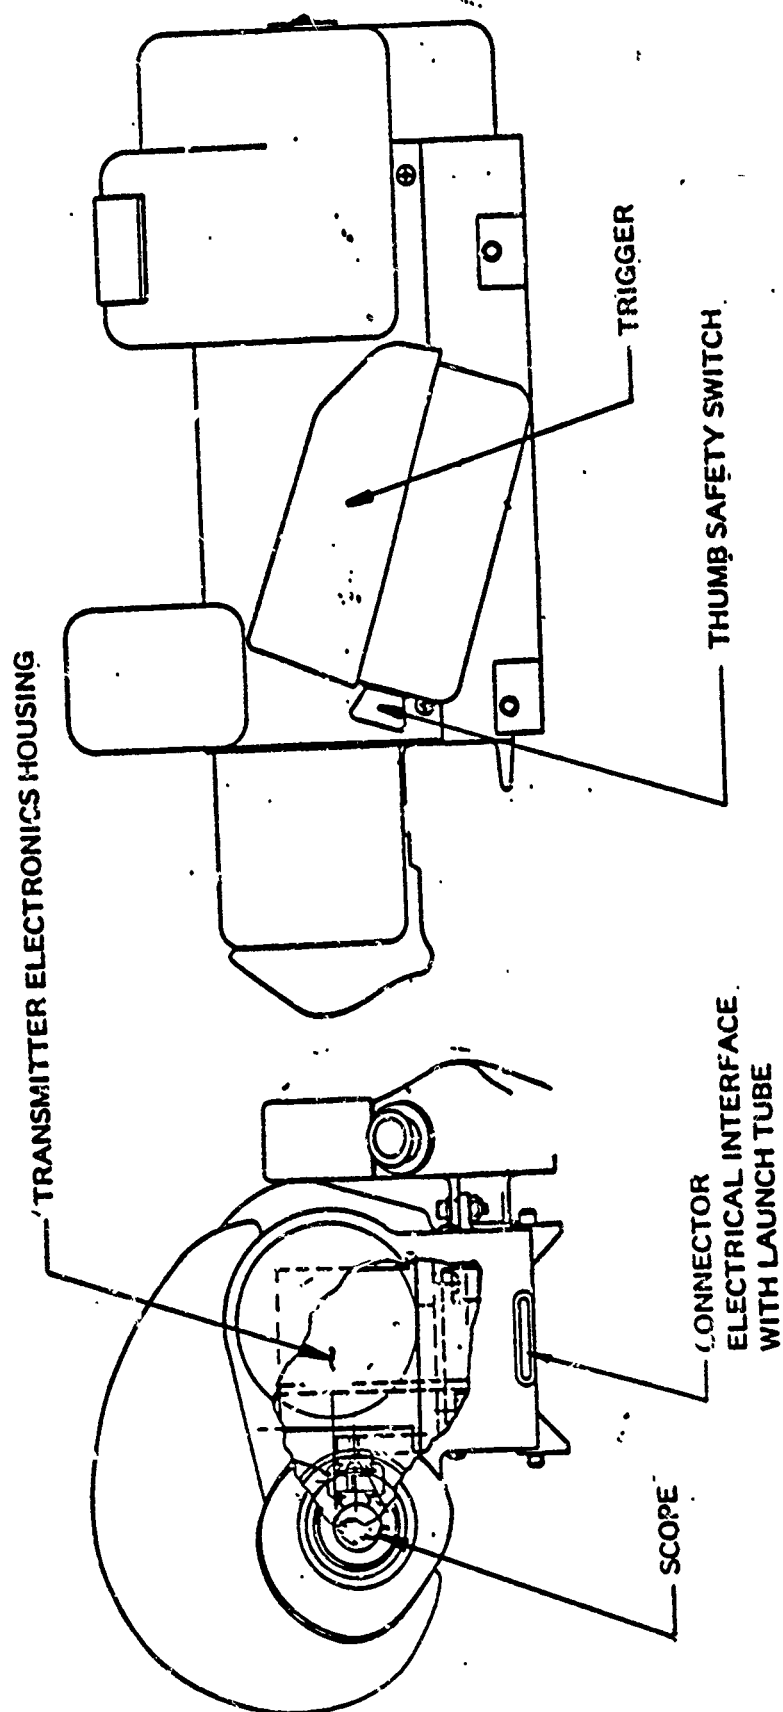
, Dragon Laser Transmitter Outline Drawing
